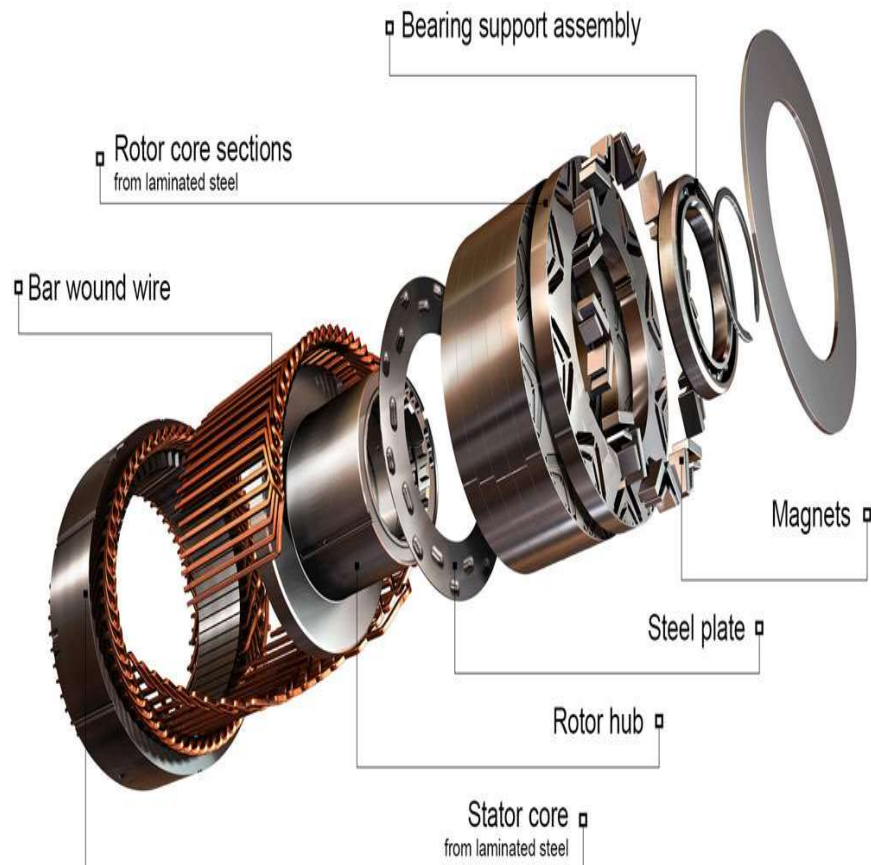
Cross Sectional View of BLDC Motor [3]
